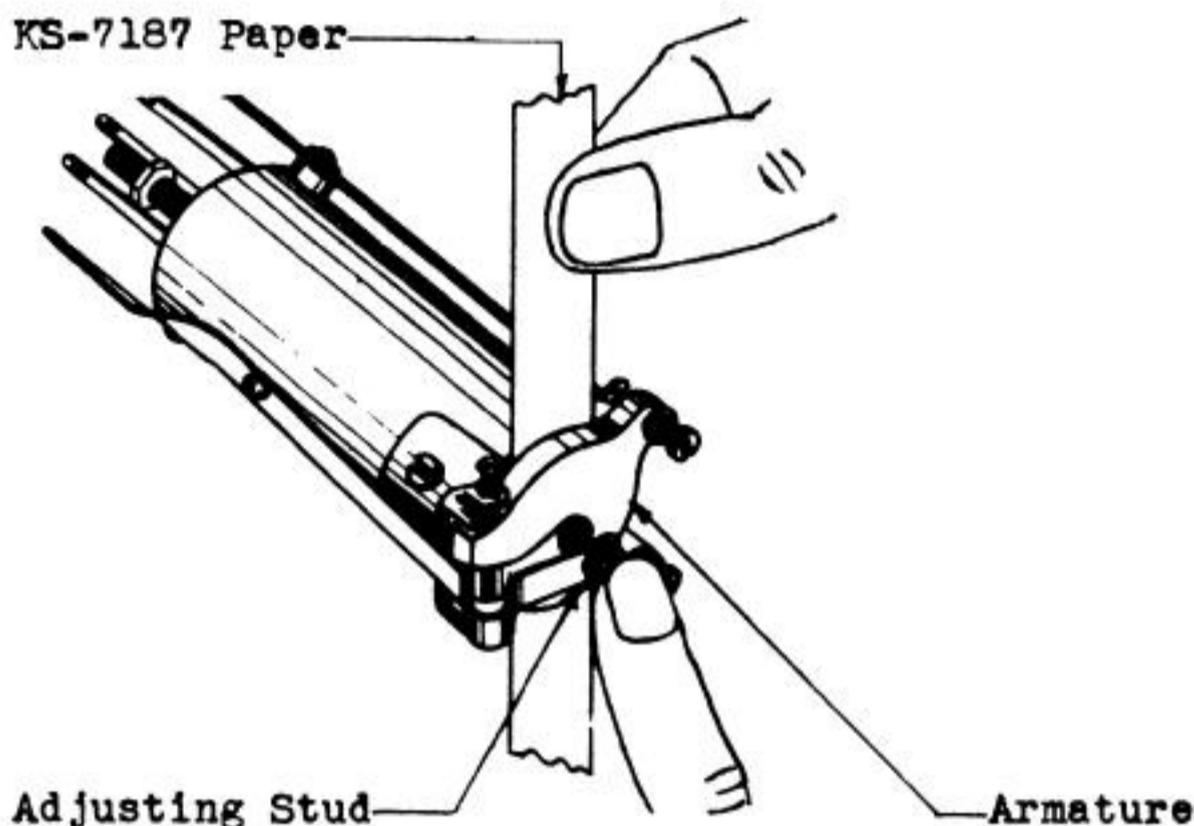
Method of Cleaning Armature Shell on 114 and Similar Type Relays
